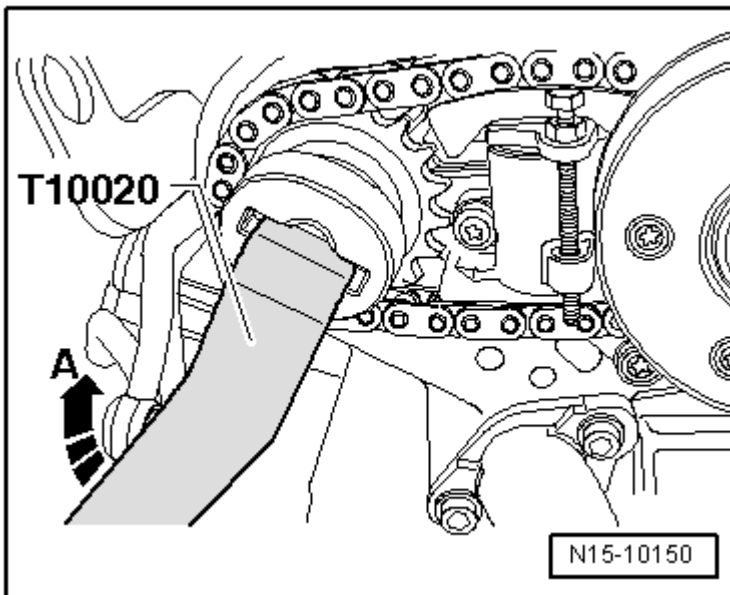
Identifying Intake Camshaft Slowly Turned With Toothed Belt Tensioner T10020
